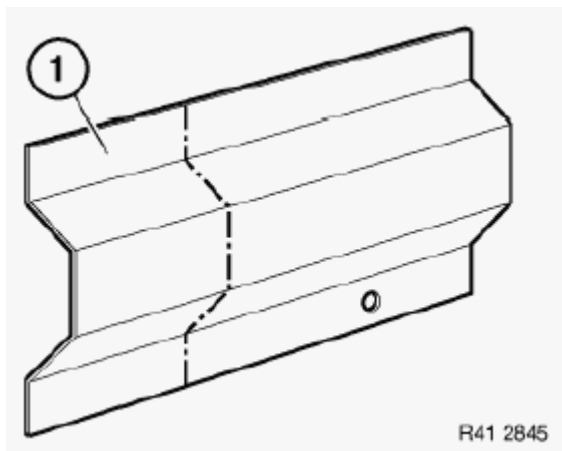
Welding In Reinforcement Plate - Cut Part
